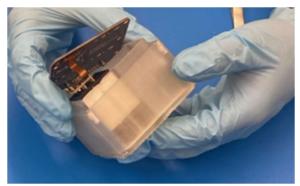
Images from test-fit integration of mechanical fit-check circuit cards and flex harness assemblies with resin SLA printed prototype structure and flight-spare scintillator unit.
